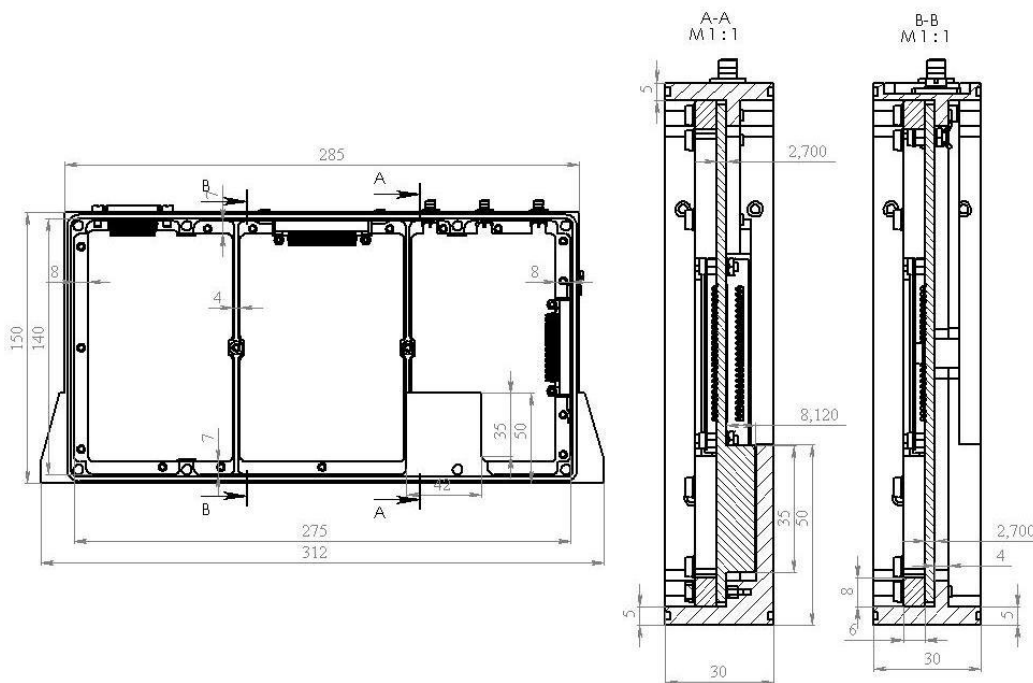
Drawing of a cassette case with a multi-layer printed circuit board
